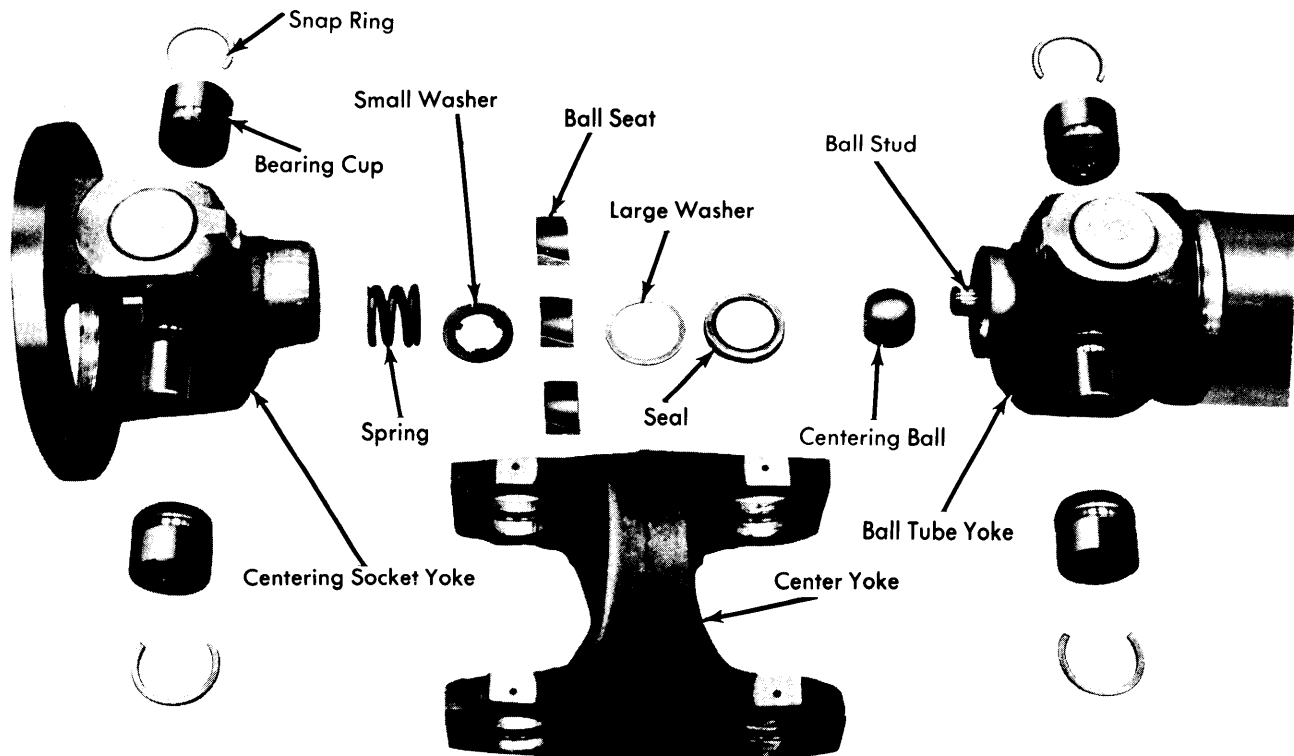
Exploded View of General Motors & Jeep Type Constant Velocity Joint
